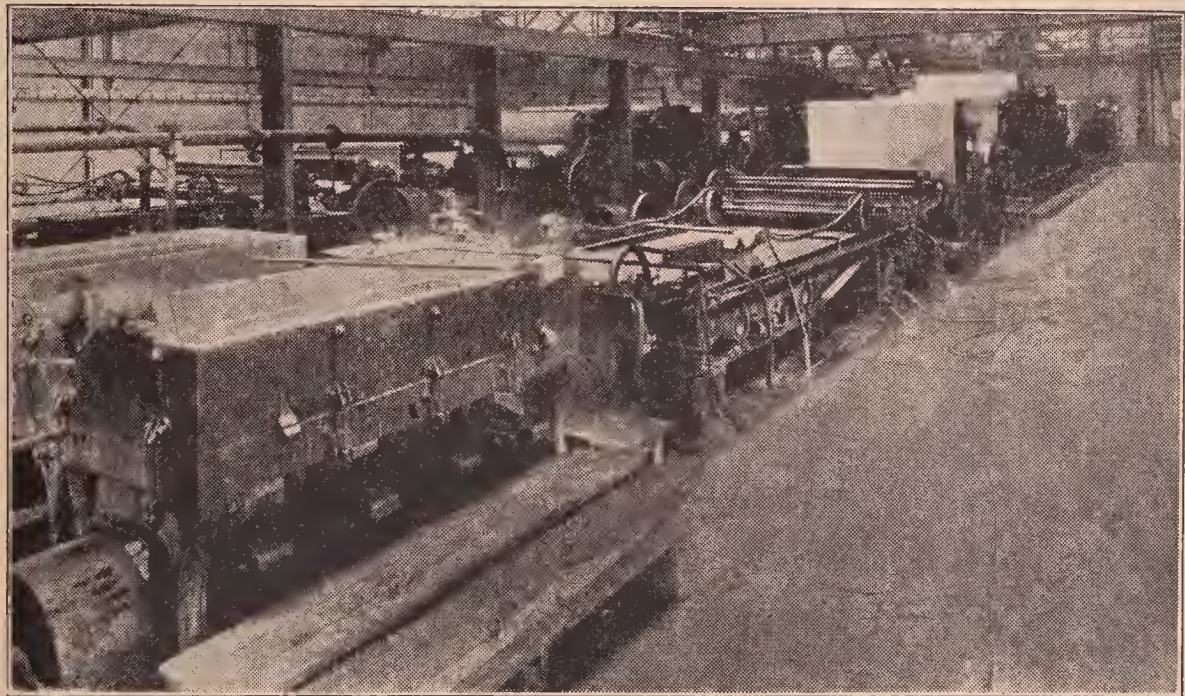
The long machine called a Fourdrinier machine for making paper.
